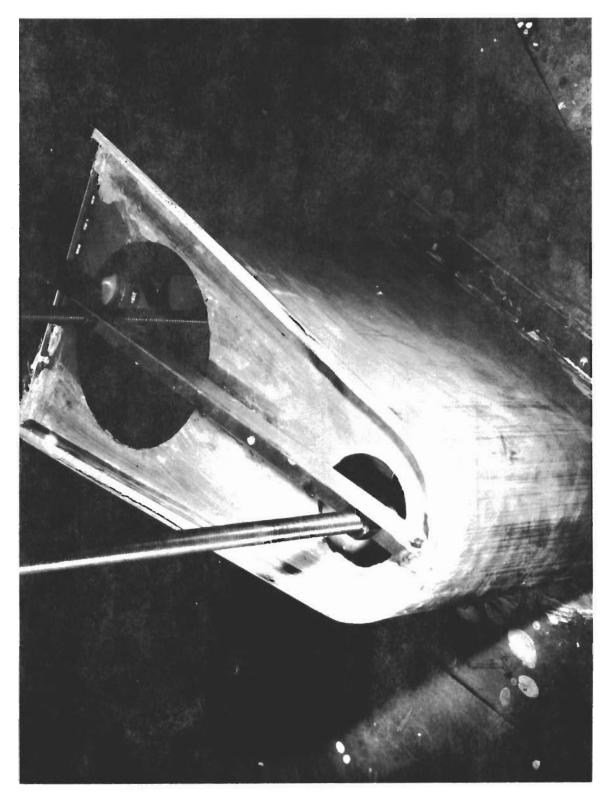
500 square inch Model Leading Edge in Mold after Casting
